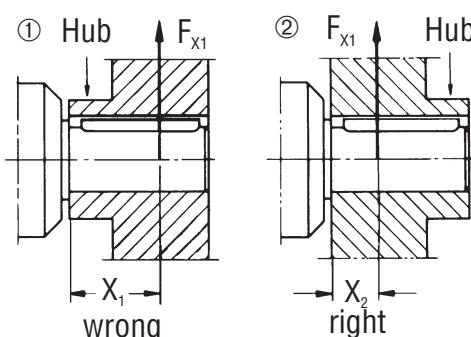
Correct mounting arrangement ② of a gear or sprocket in order to avoid impermissibly high overhung loads.
